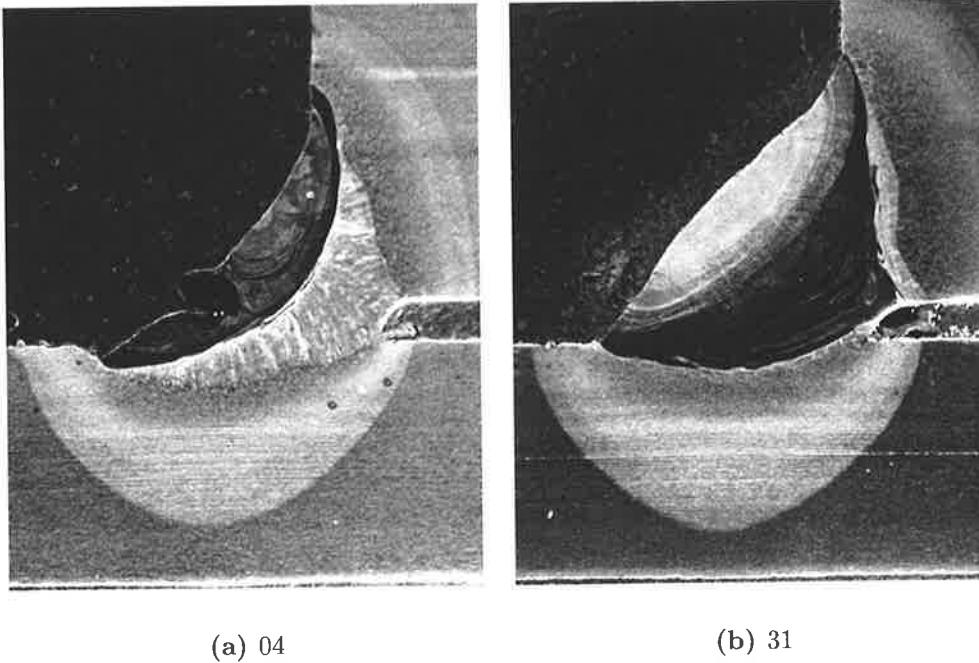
Examples of welds contaminated by thermocouple wire.
